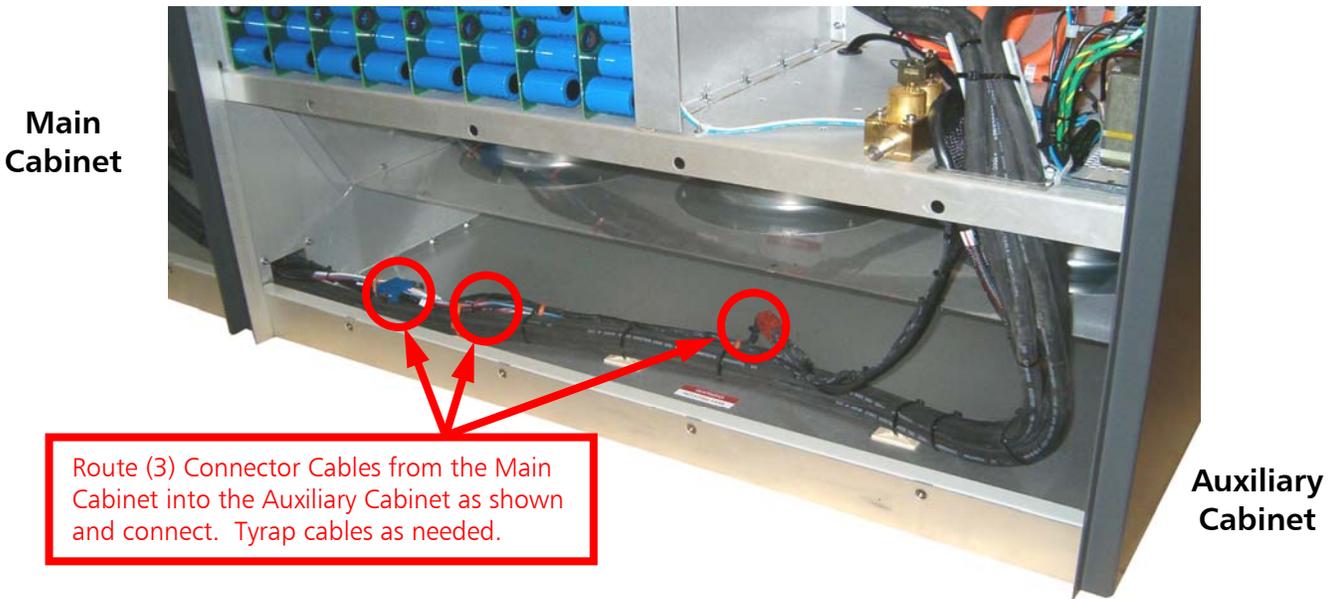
4MX 100, 18V, and Fan Interconnect Cable Routing and Connections (Rear View of Auxiliary Cabinet)
